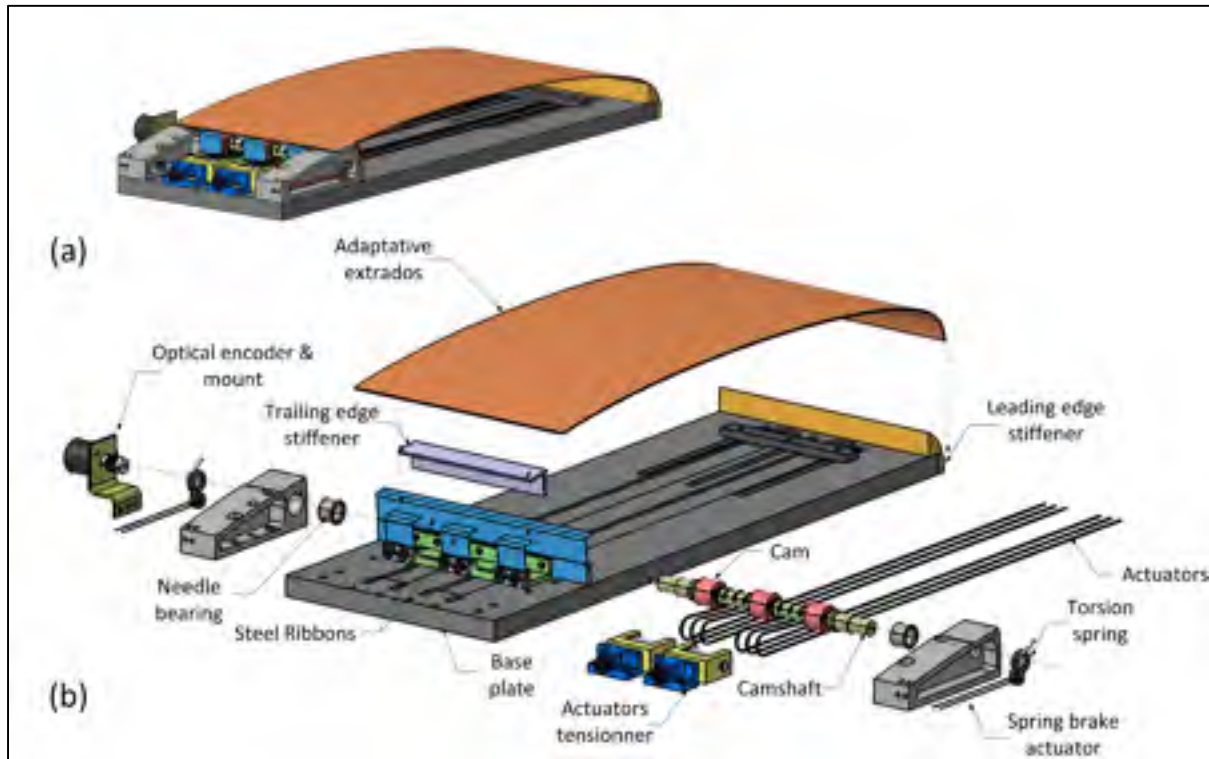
Illustration of the actuation mechanism (a) Assembled view and (b) Exploded view
